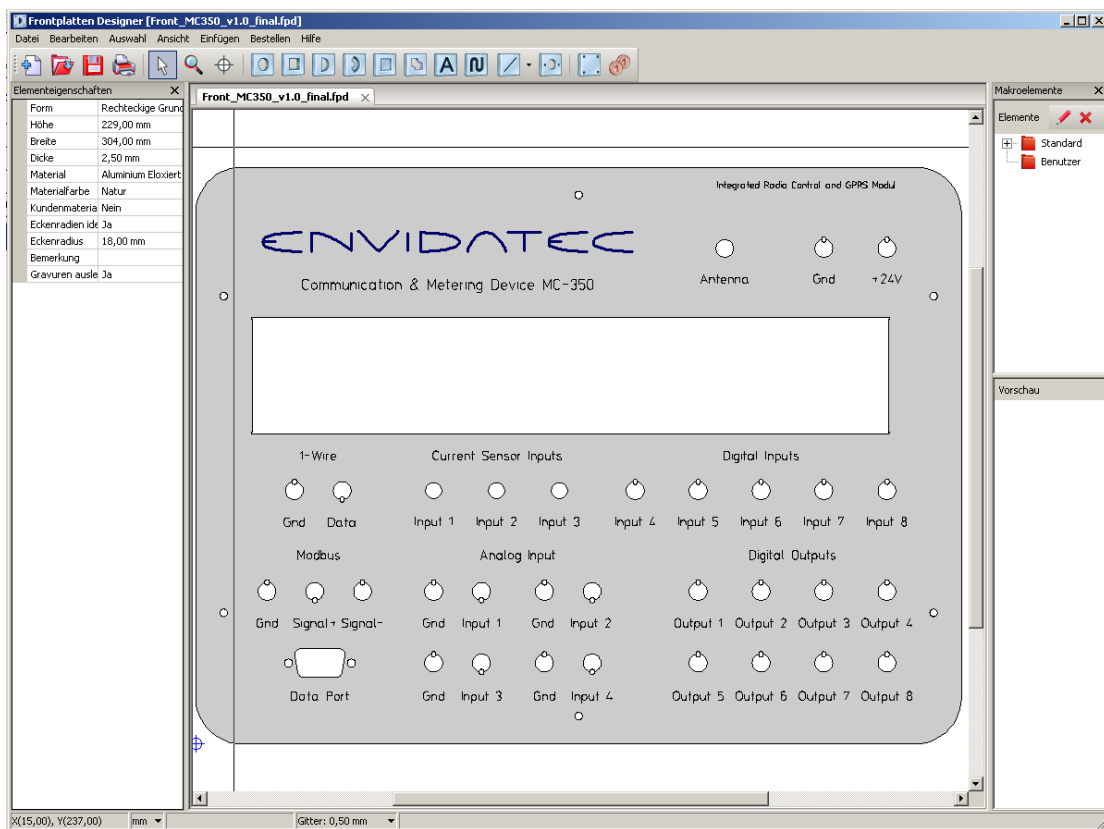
Schaeffer AG Frontplatten Designer version 4.01
